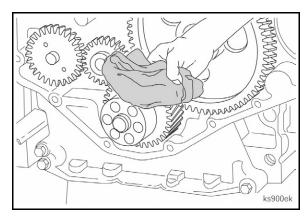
CLEAN THE BORE AND THE CRANKSHAFT SURFACE
